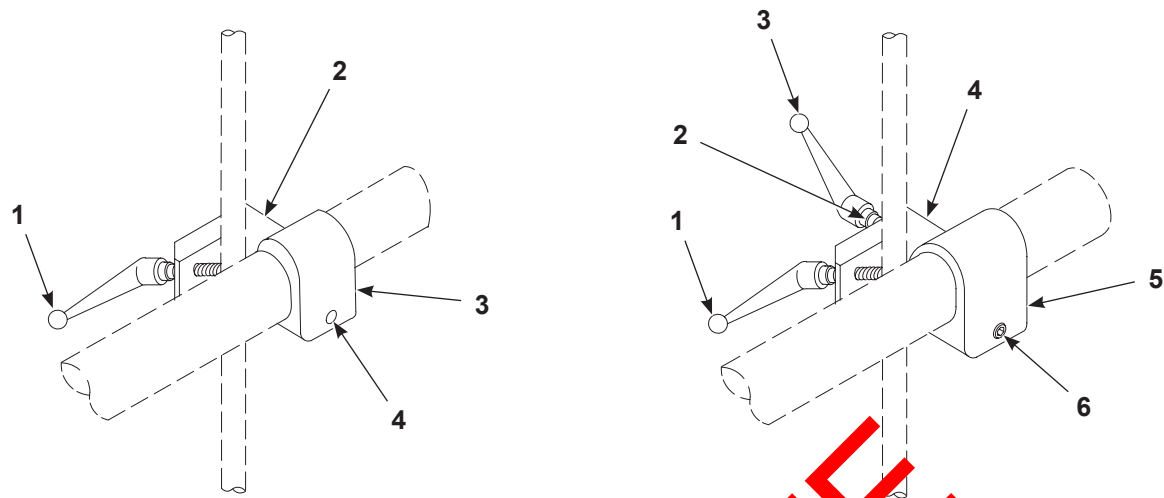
Gun Bar Mounts for Tube-Mount Guns
